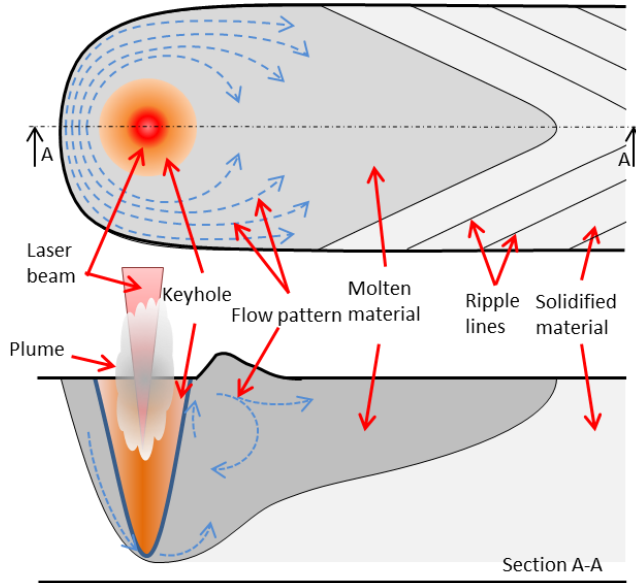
Sketch showing the principle in keyhole welding. Constructed from [35].
